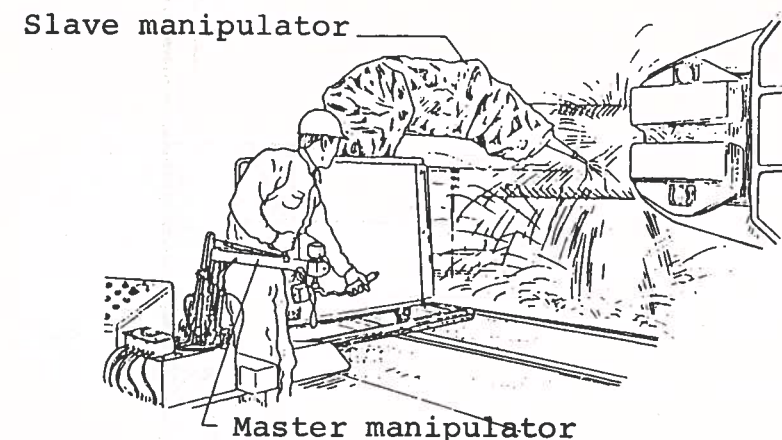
Scarfing robot removing defects from high-temperature forging.
